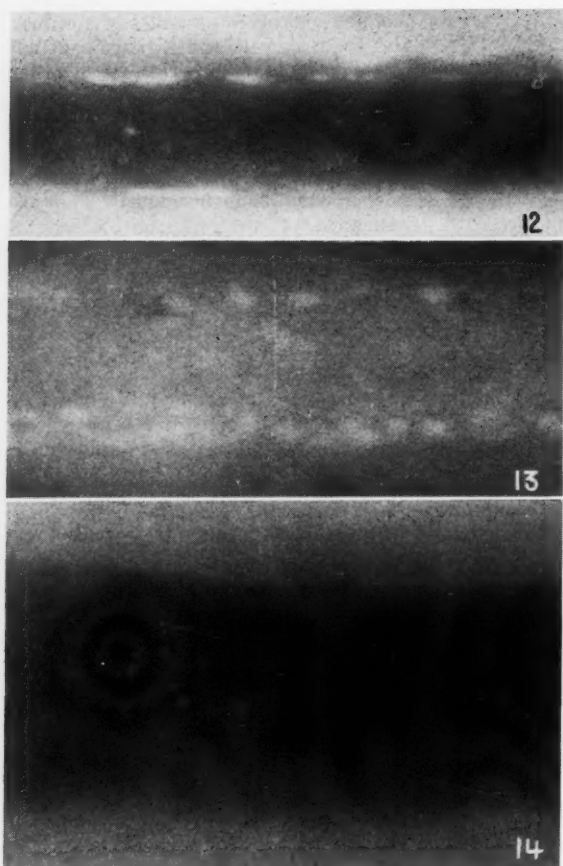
Exograph of a weld showing lack of proper fusion between weld metal and parent metal. Fig. 13—Exograph of weld showing improper fusion and slag inclusions. Fig. 14—Exograph showing gas inclusions in weld.
